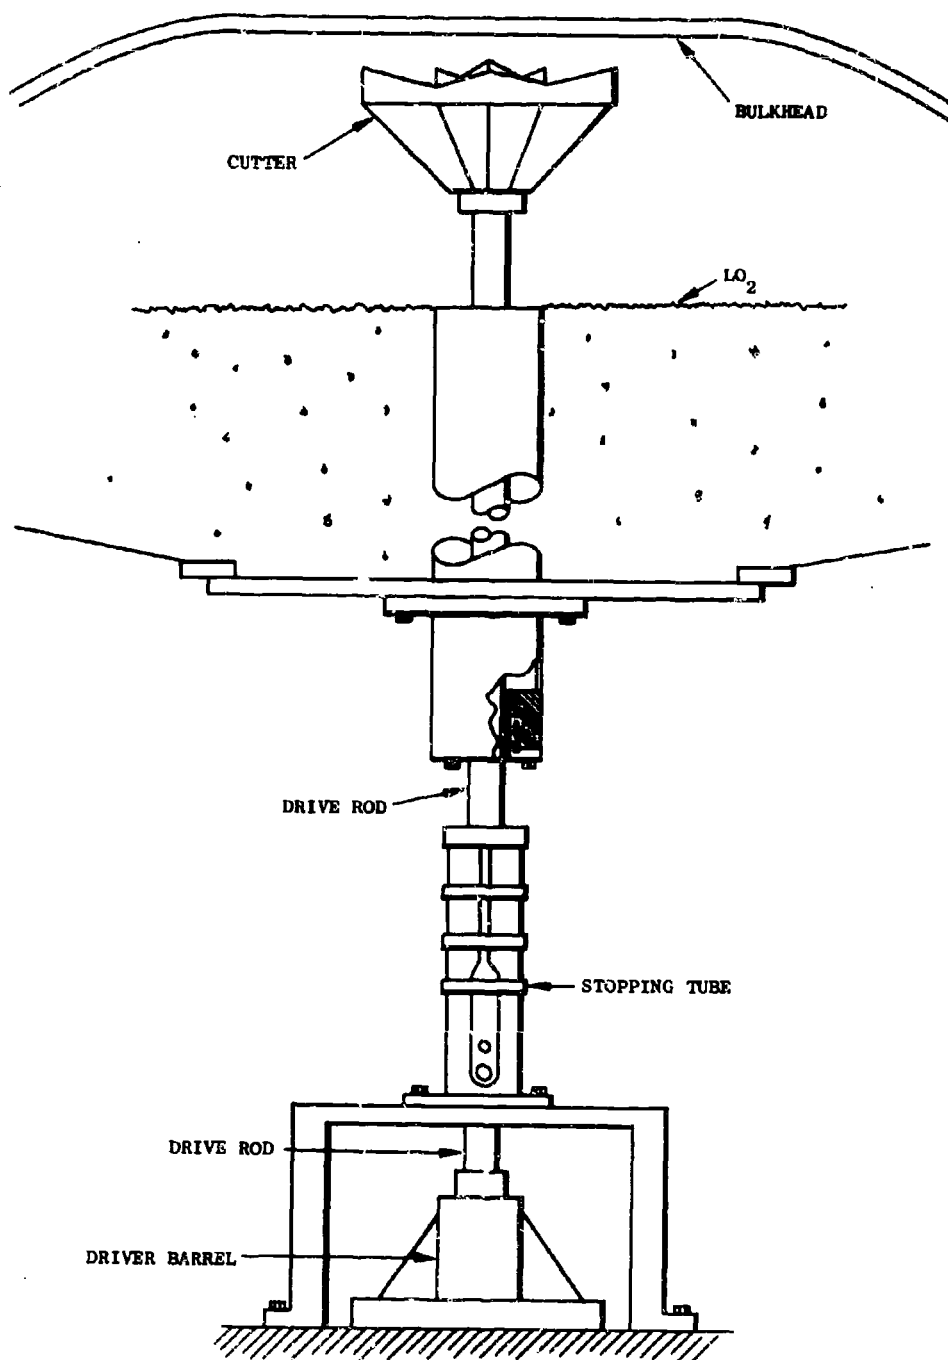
Saturn S-IV Cutter Ram Assembly
